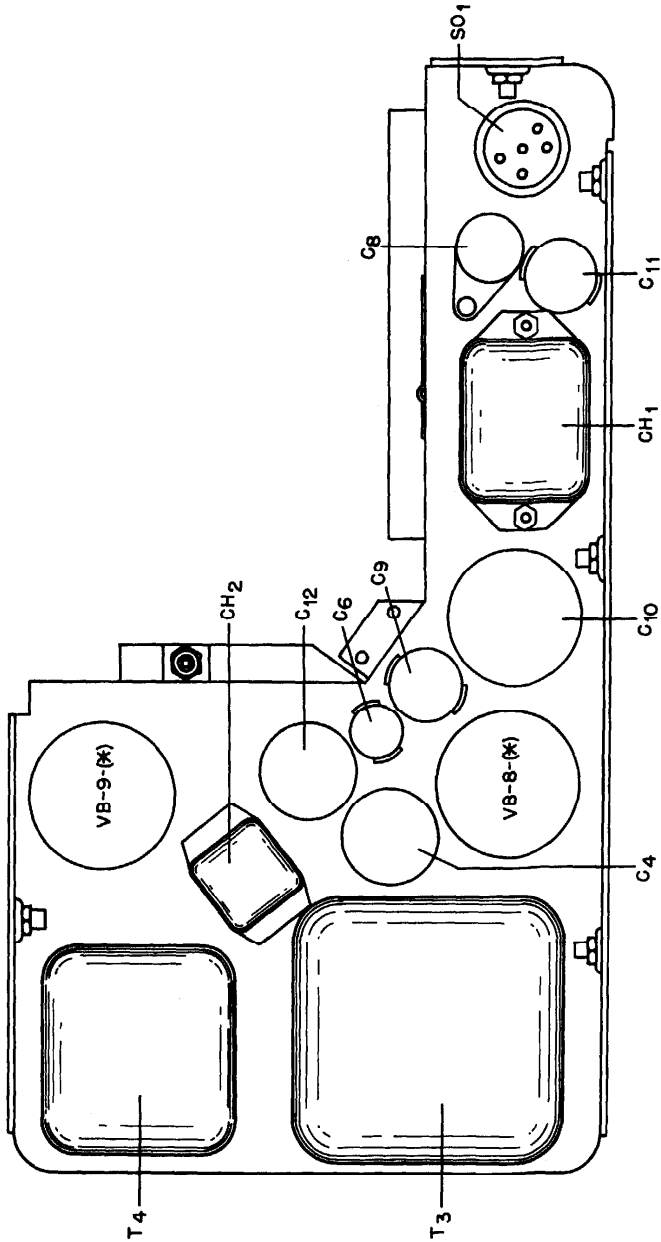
Power Supply Unit PE-157-(\*), Top View, Showing Major Parts
